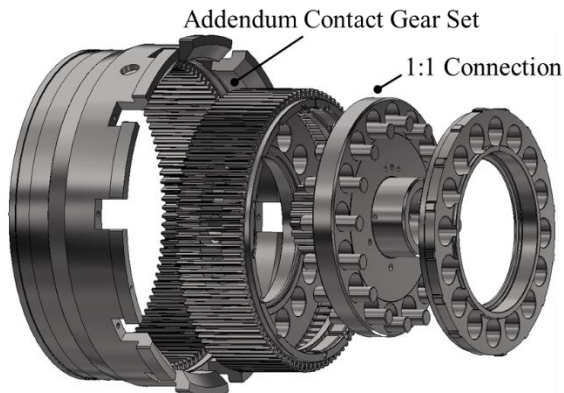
Exploded view of a 1:1 connection integrated into a coplanar gear set
